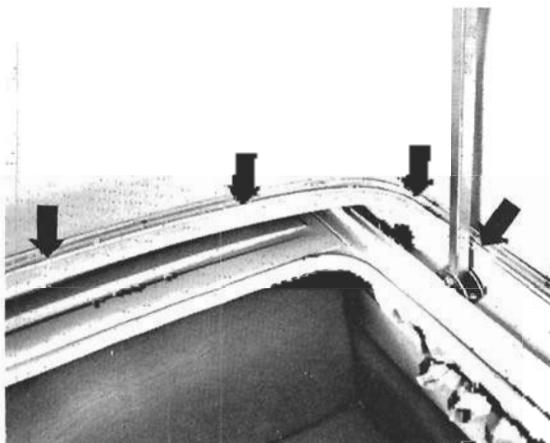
Strips that hold the bellows on the body. Remove bellows as shown.
